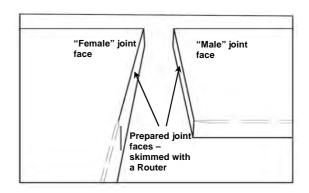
Joint faces showing where the material needs to be skimmed for a good unobtrusive finished joint.
